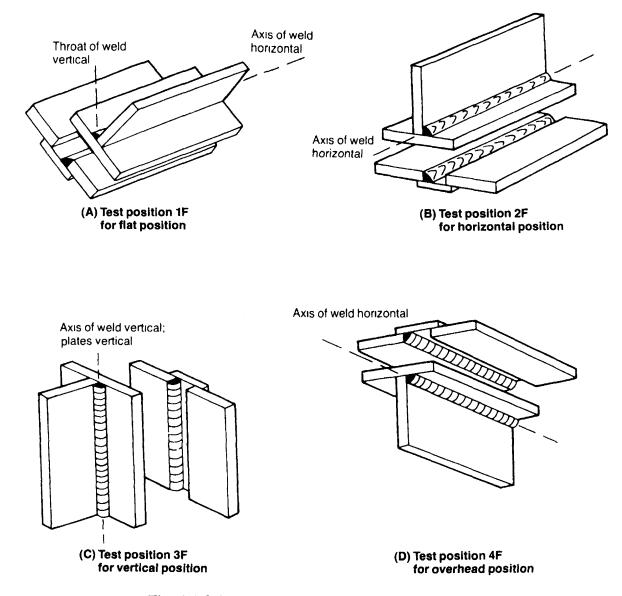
Positions of test plates for fillet welds
